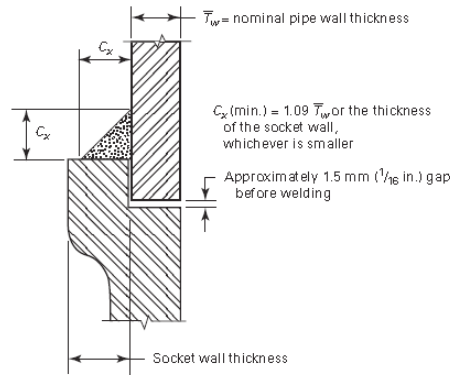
C Minimum Welding Dimensions for Socket Welding Components Other Than Flanges
